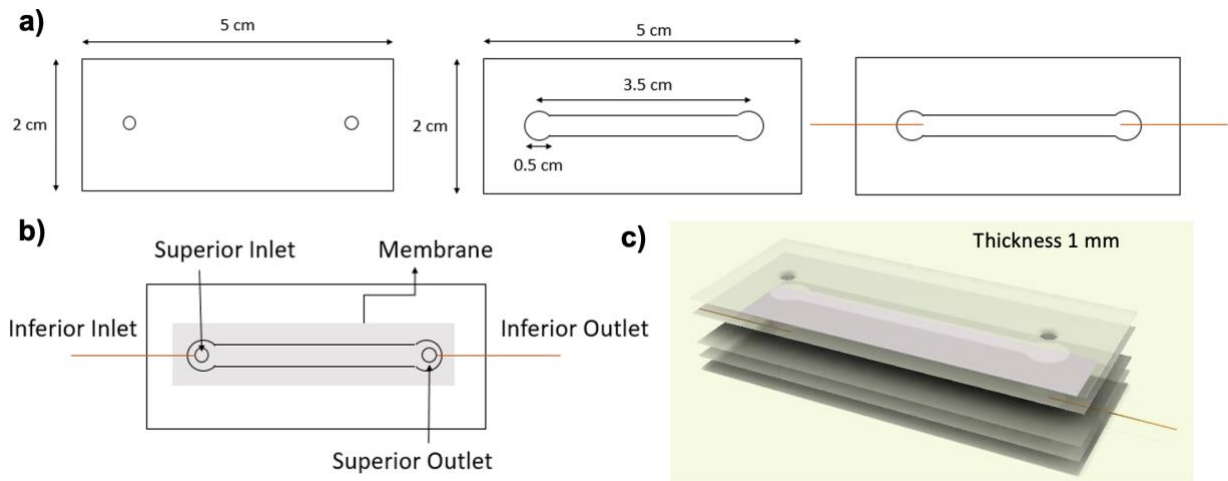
Design, dimensions and 3D view of the device #1 a) Pieces of the chip with their dimensions b) Top view of the device with the indication of the main components and c) 3D view indicating the assembly of the device.
